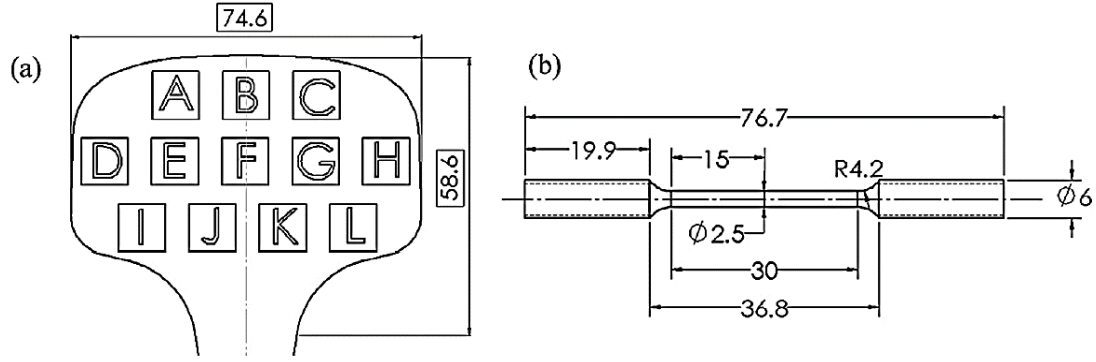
Tensile test specimens: (a) sampling locations on the cross section of railhead, and (b) dimensions and geometry of the tensile specimen [73].
